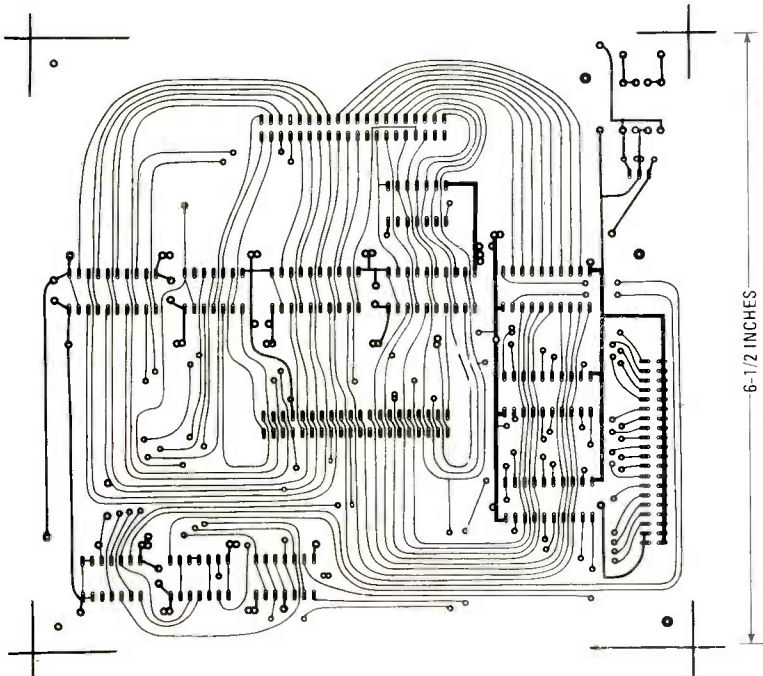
SINGLE-SIDED PC BOARD is used for construction of TRS-80 buffered interface.
